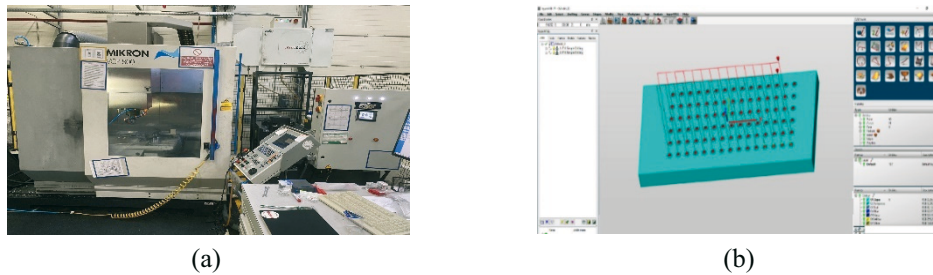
(a) CNC Vertical Machining Centre Micron VCP 800; (b) *hyperMILL*® CAD/CAM Program
